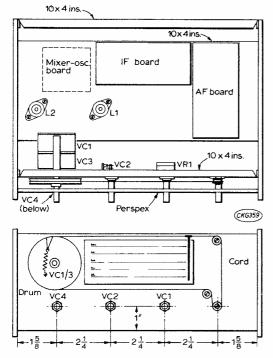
Positioning of the major components on the chassis and front panel with details of the dial drive mechanism.
